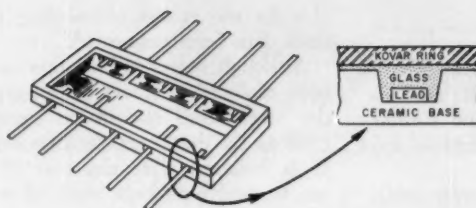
Hermetically sealed semiconductor-network package assembly.
